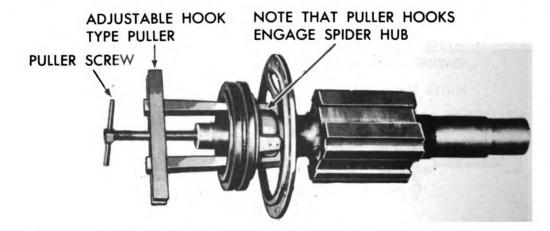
Removing Rotor Collector Ring and Spider Assembly. Digitize 242 GOOSIC MAINTENANCE SECTIONITY OF CALIFORNIA
